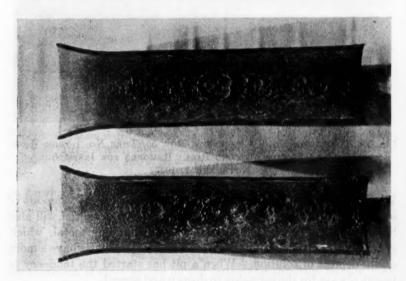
Inlet Ends of Tube No. 6, and Tube 18, Row 4, East Bottom Section No. 9 Condenser. Removed for Inspection January 3,
